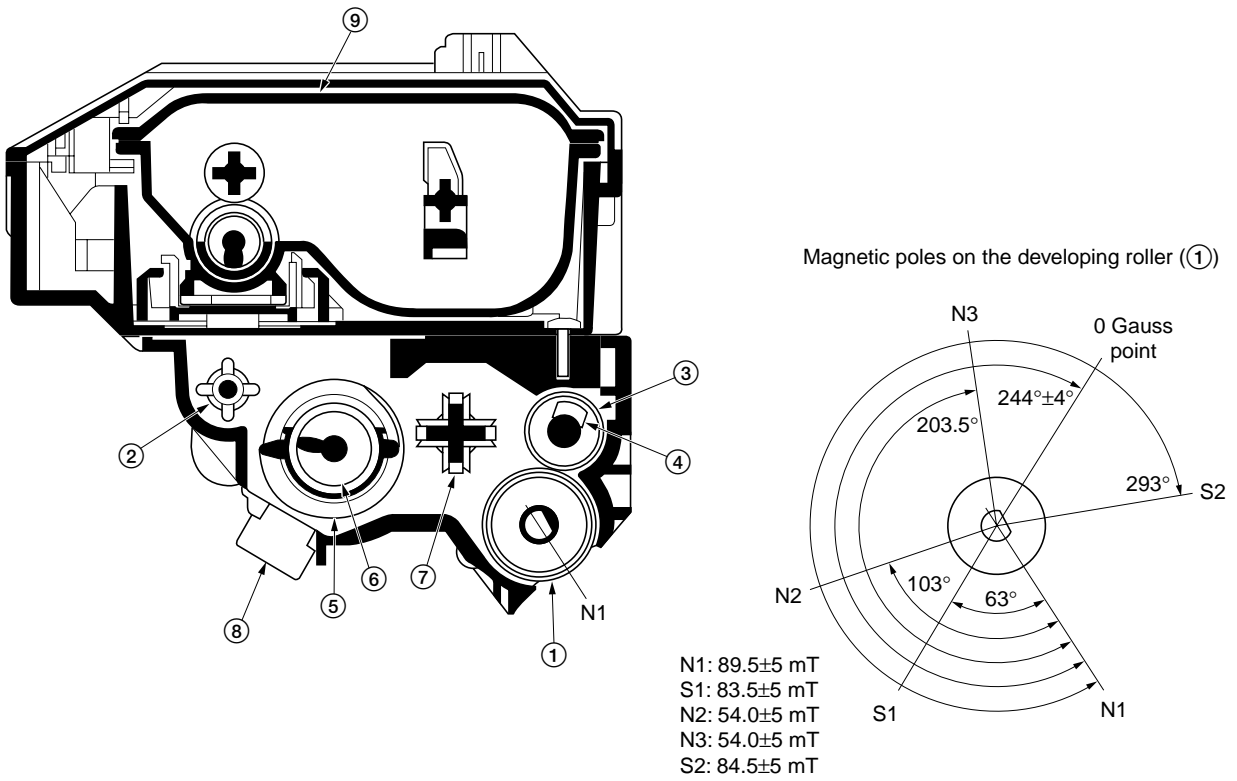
Yellow developer and magnetic poles on the developing roller
